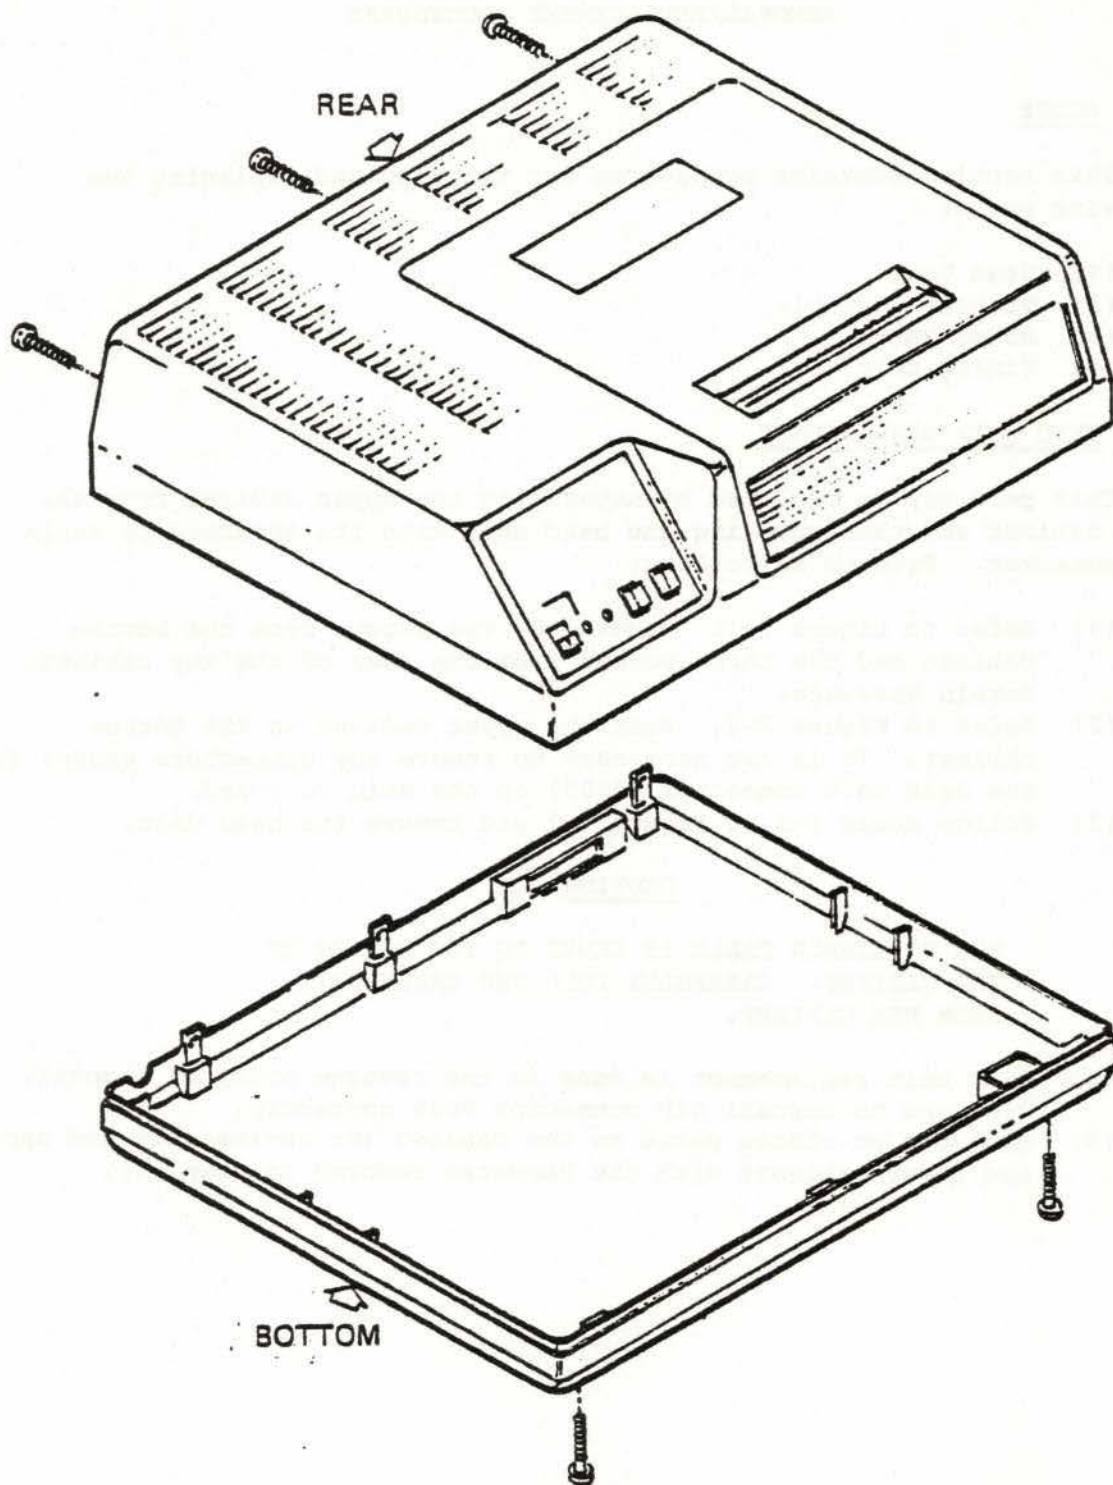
UPPER/LOWER CABINET REMOVAL
